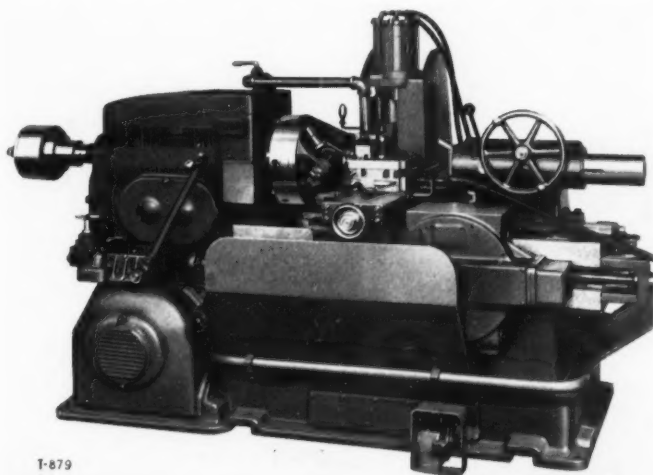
15" Automatic Stub Lathe equipped for turning forgings shown in Fig. 1.
